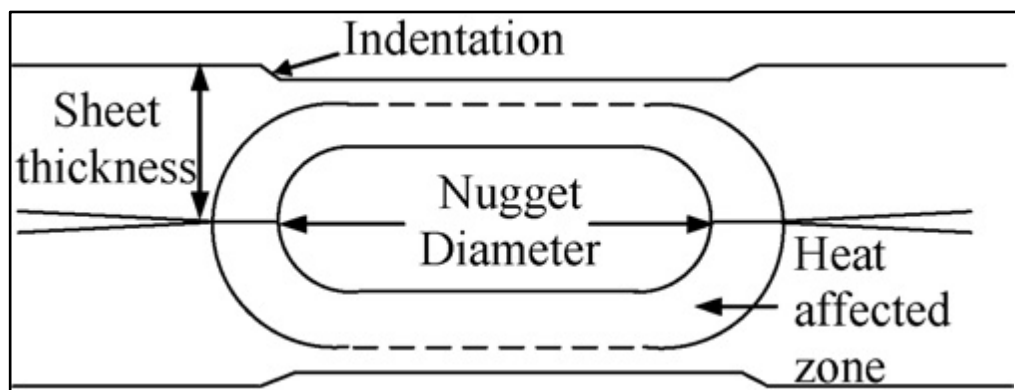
Schematic cross-section of a spot-weld.
